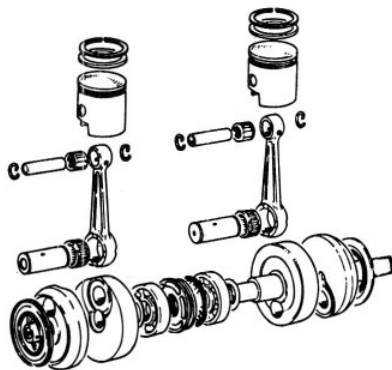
Exploded view of built-up crankshaft and associated parts used on some two cylinder engines.
